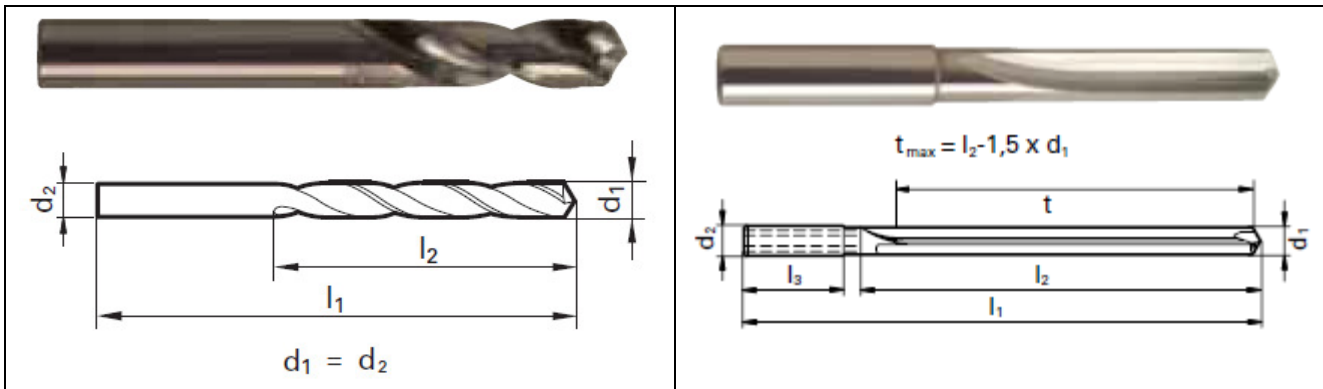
a) Guhring twist drill series 768 b) Guhring twist drill series 223
